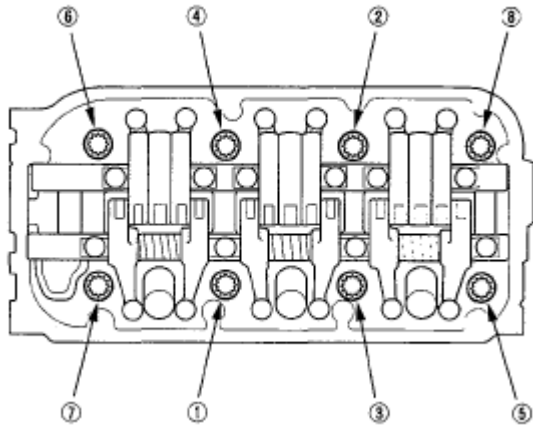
Identifying Cylinder Head Bolts Loosening Sequence
